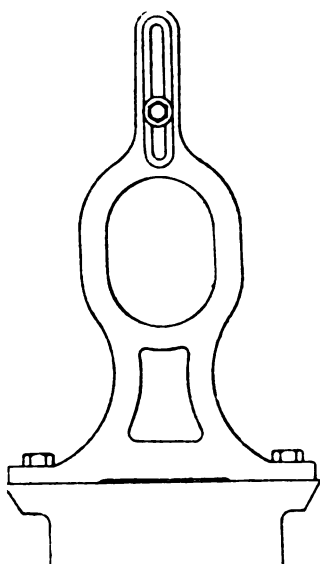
Bracing Bracket bolted on Face of Knee.
